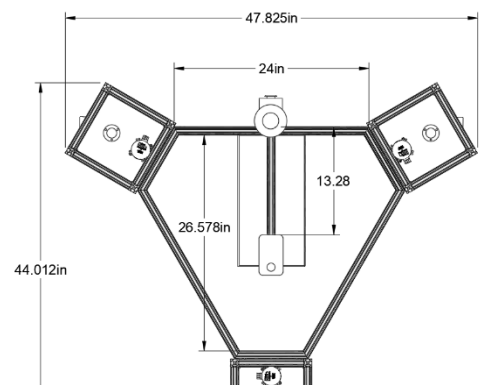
Dimensioned top view of Warrior 1 mechanical layout.
